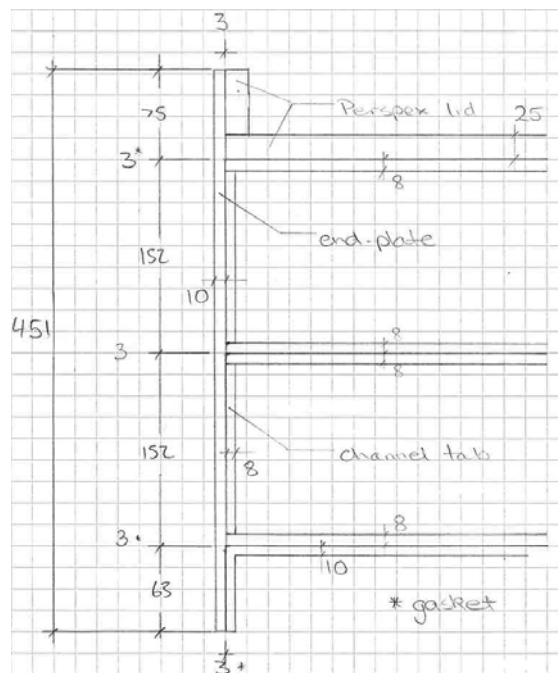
Elevation of flume end detail (bolts not shown) (dimensions in mm)
